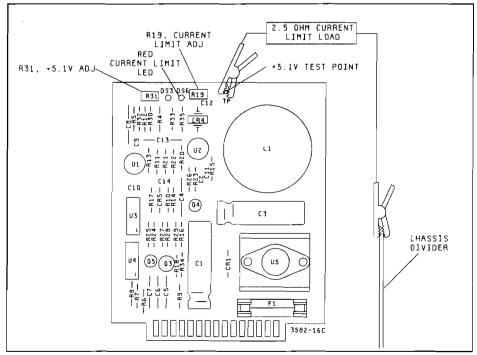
+5 V Power Supply Board, A16 (Rev D).
